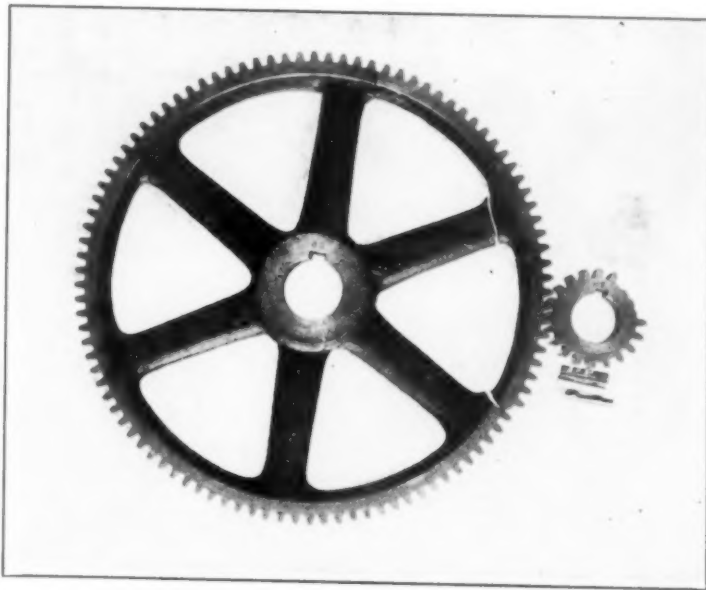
20 TOOTH ENGAGING 100 TOOTH, TEST 03, SERIES 1
